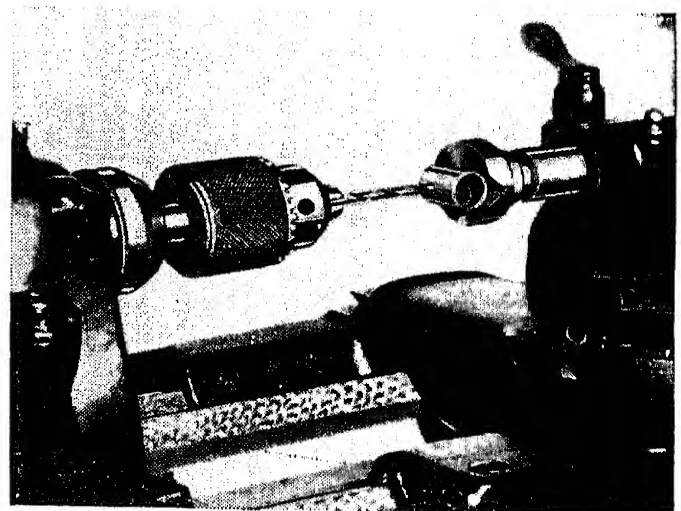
Drilling an oil hole in a bushing held by a crotch center on the tailstock. (Courtesy South Bend Lathe Works.)
